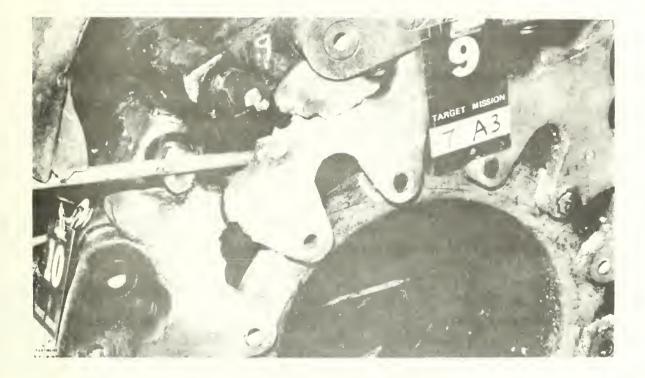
Impact Nine, Target 7, Showing Destructed End Connector, Damaged Track Shoe Pins, and Broken Right Drive Sprocket.
